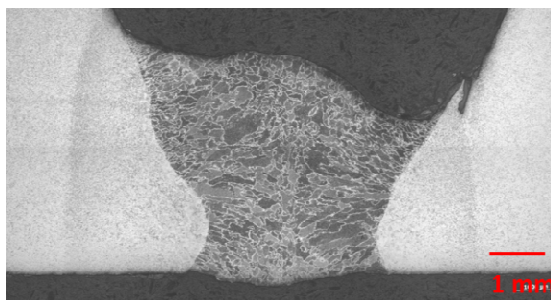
Sample A – root welded with IAC 80 A
